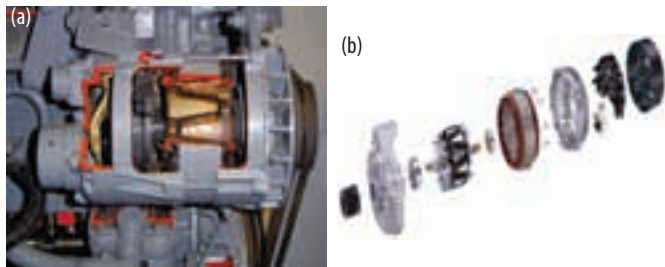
(a) Typical claw pole alternator which is driven by the belt (extreme right) connected to the engine and (b) exploded view showing the claw pole (indicated by arrow) made of soft magnetic material
